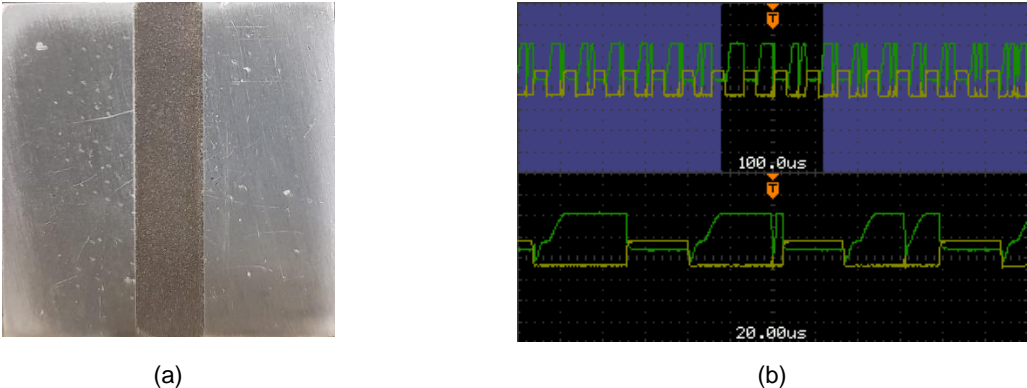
(a) Machined workpiece surface and (b) its respective electrical signature.
